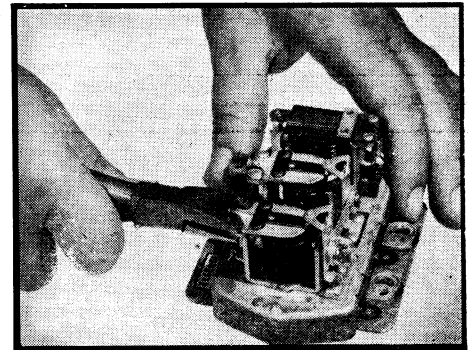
Showing a pair of glass pliers machined to form a tool for floating Auto-Lite regulator armatures. The drilled holes form around the rivets and the slot cut between the holes straddle the armature spring hanger. This tool may also be used to float Delco-Remy armatures of the 1118300 and 1118700 series
